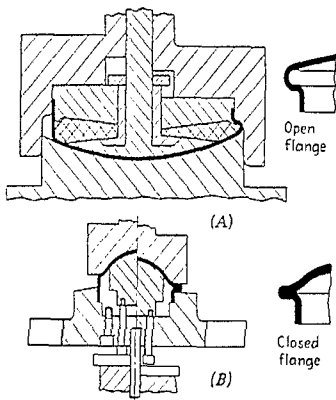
Dies for expanding flanges on cover shapes: (A) open-flange tool; (B) closed-flange tool.[†]
